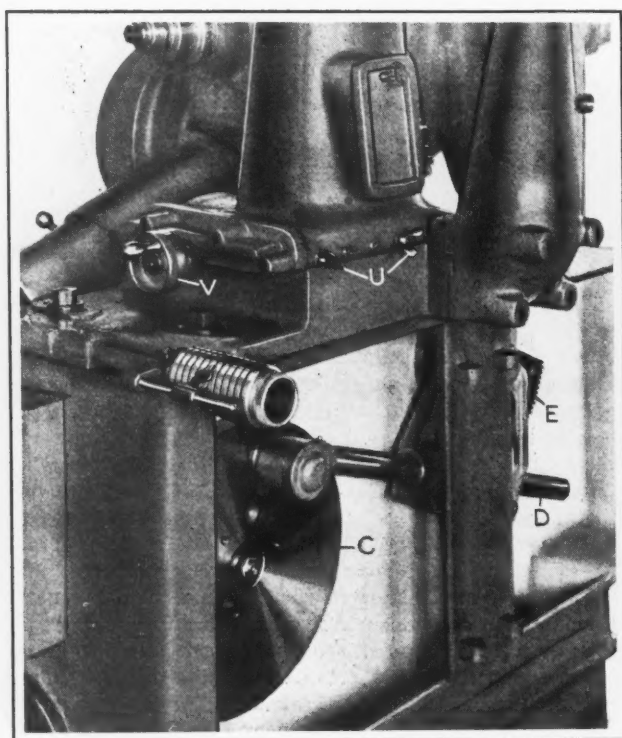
Mechanism that produces the Rotary Movement of the Work-spindle
